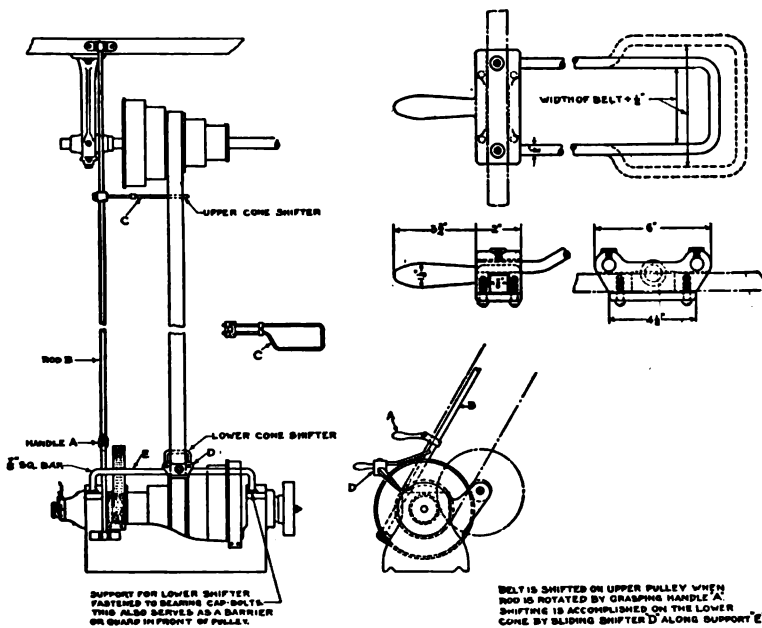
Cone Pulley Belt Shifter. (Device for upper cone patented.)
